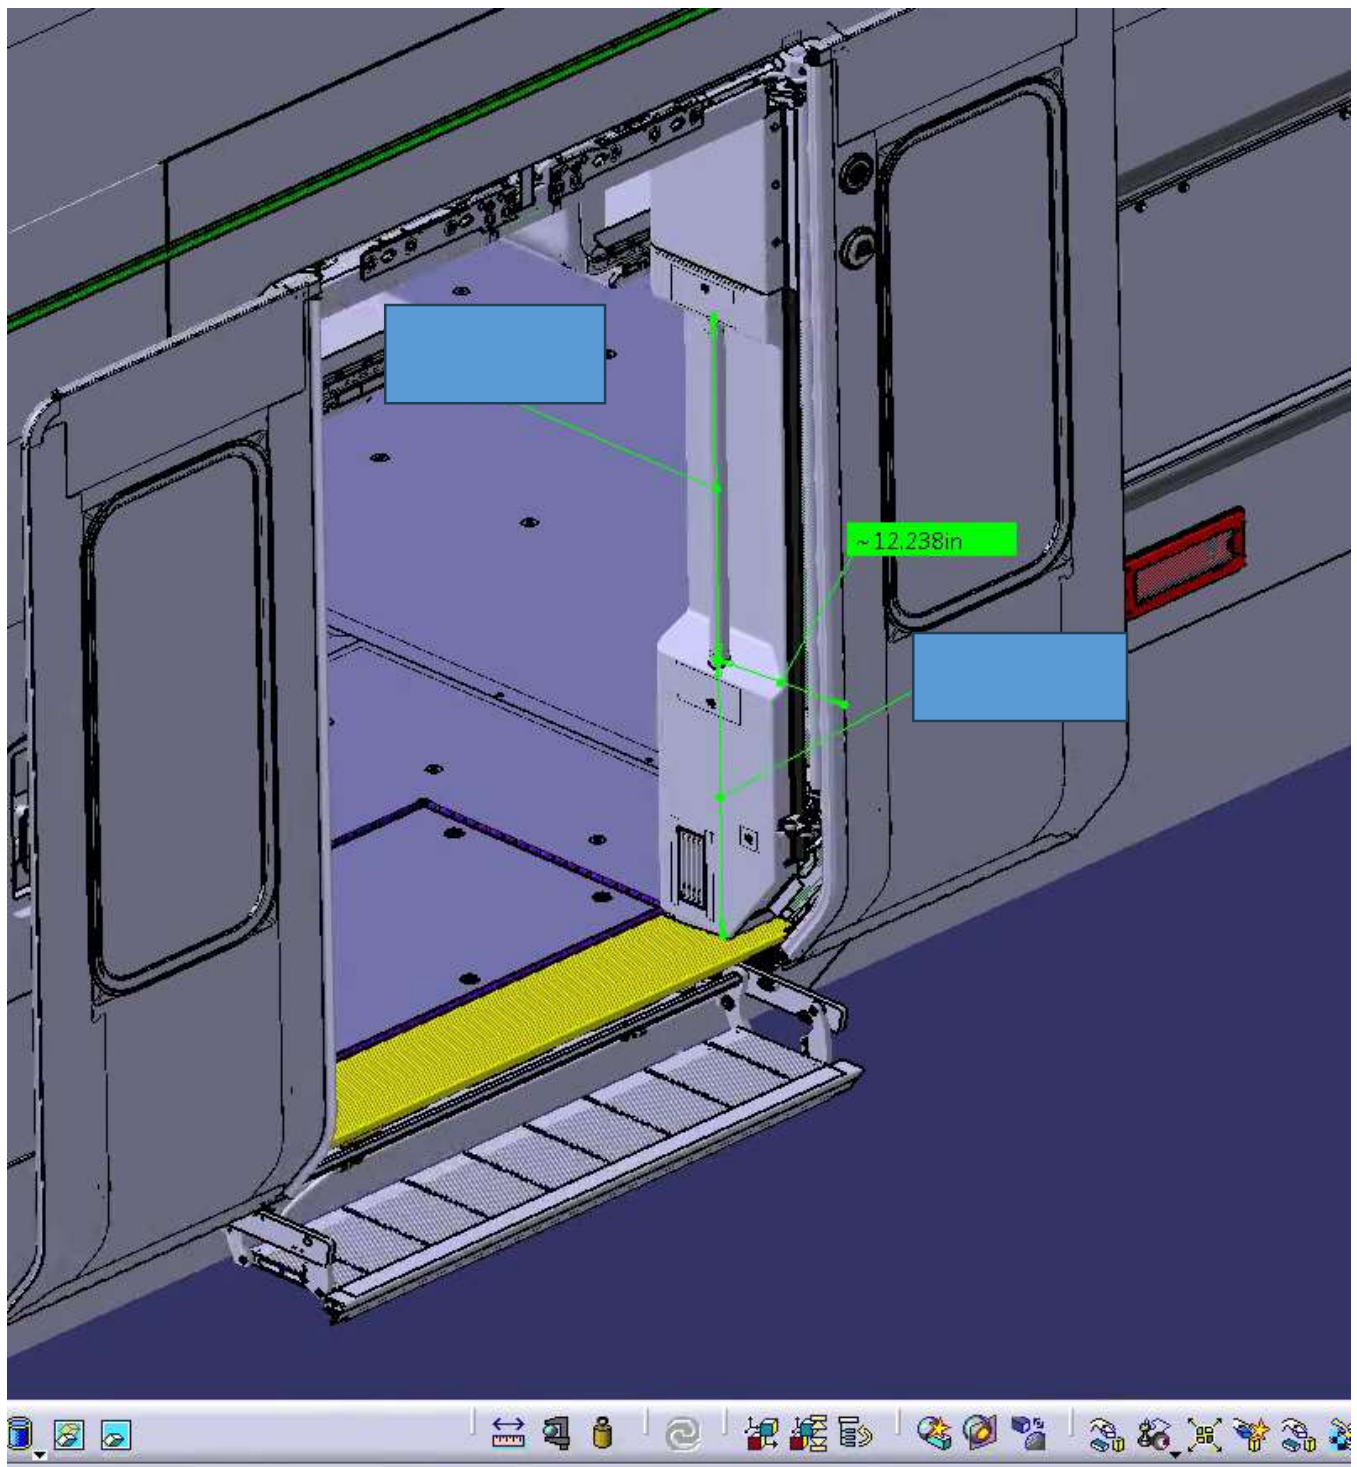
Lateral Location of Side Door Handhold (from outside surface of door to centerline of handhold)
